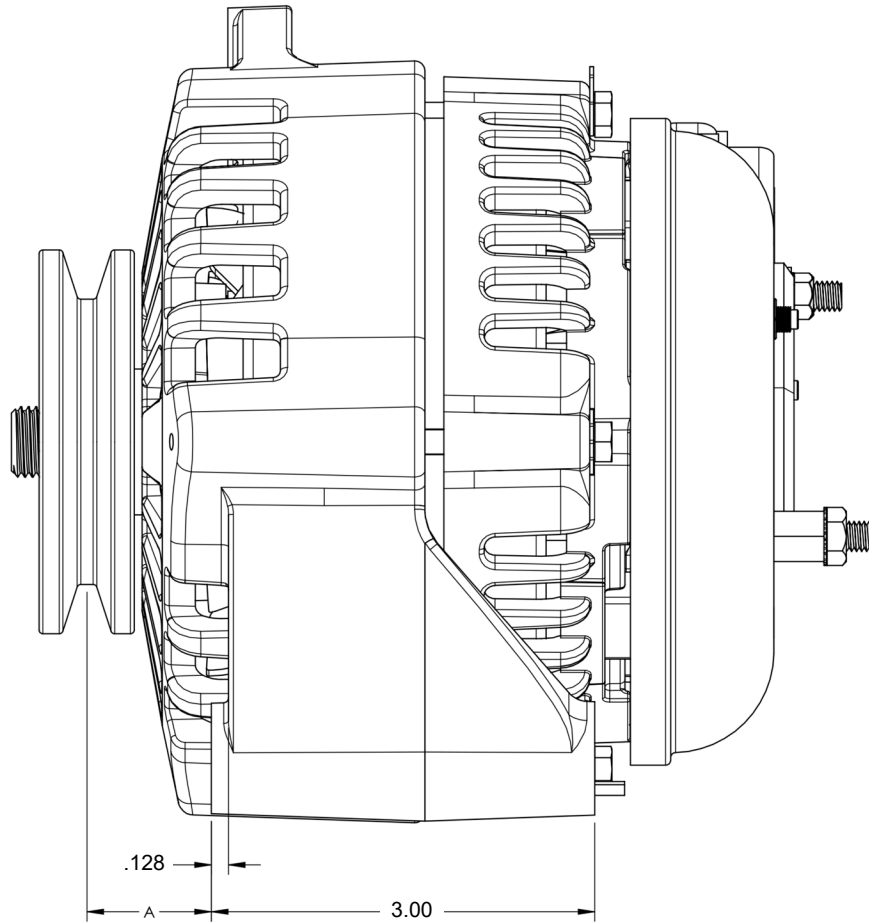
ALT-FLX Alternator - Side View 2
